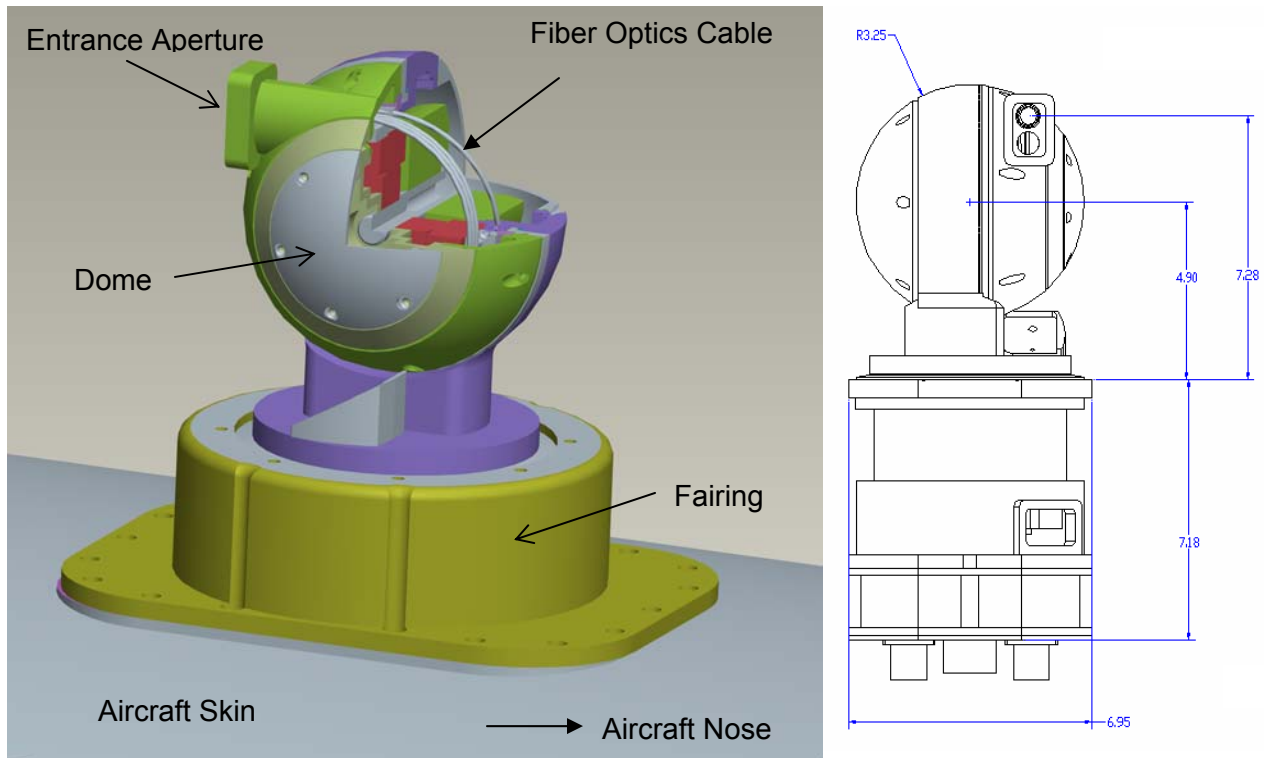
Partially sectioned model (left) and dimensioned drawing (right) of instrument head. Dimensions are in inches.
